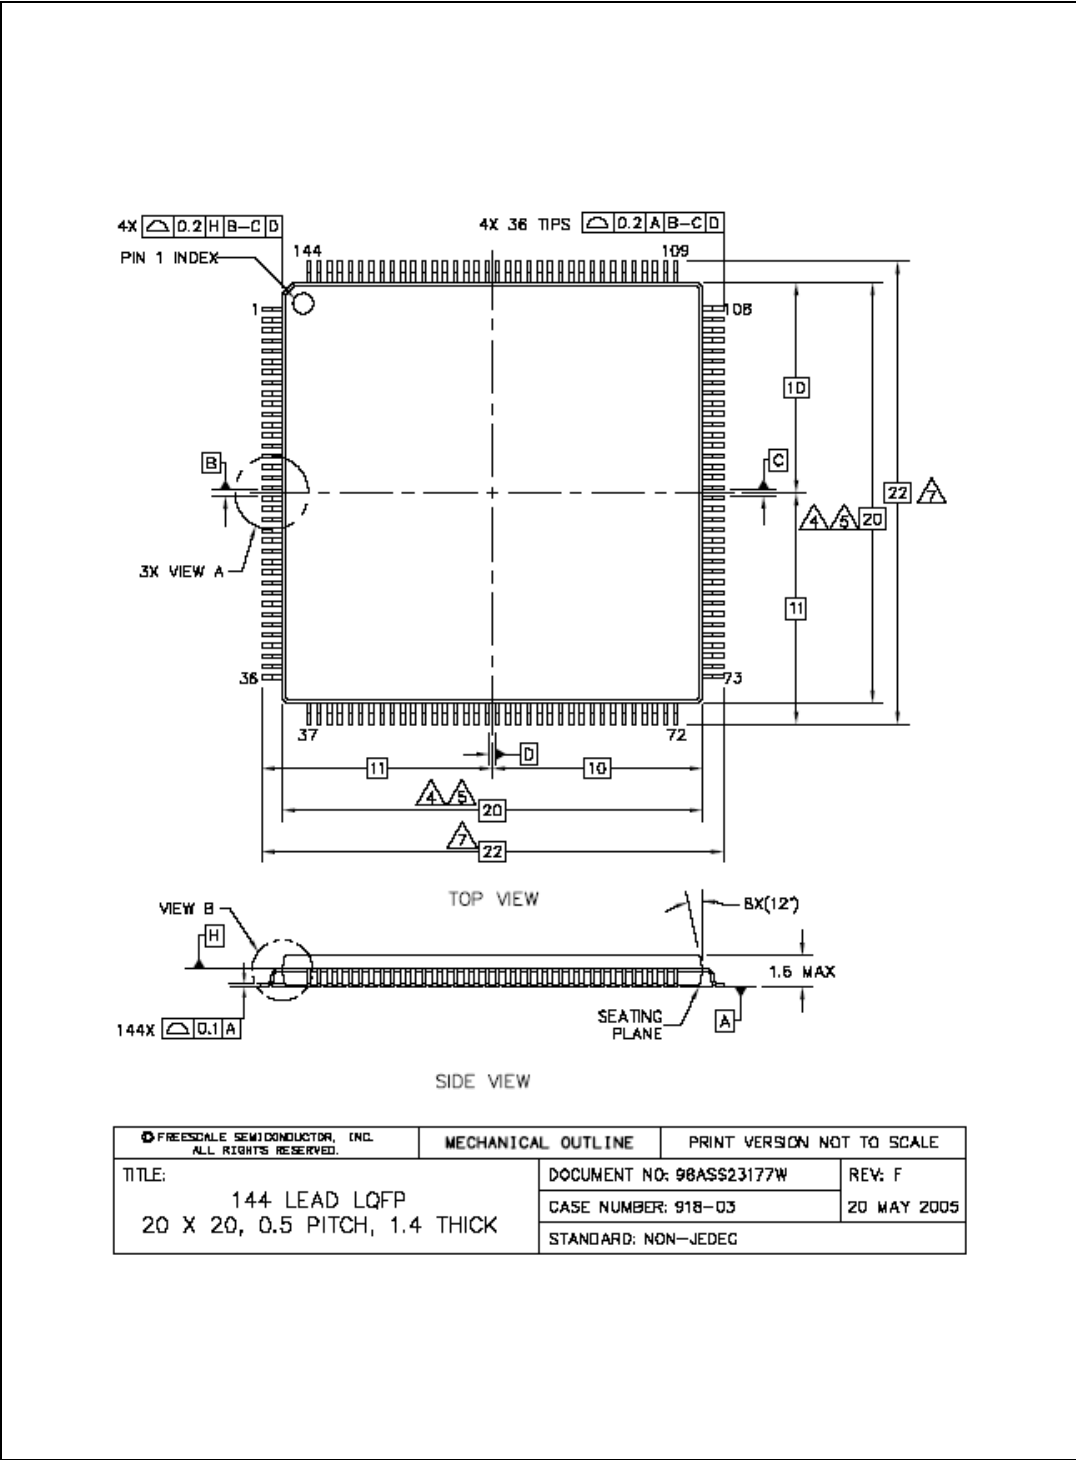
144 LQFP package mechanical drawing (1 of 2)
